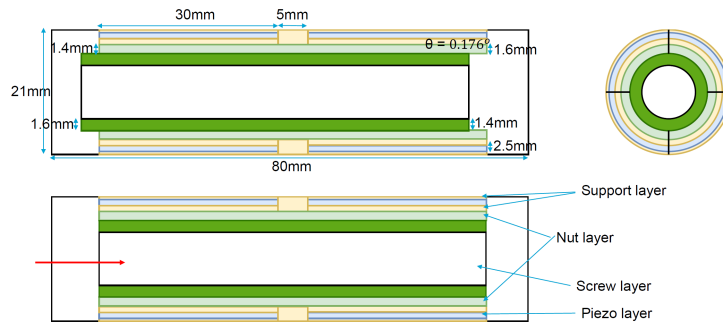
Draft of the preload design one: "wall anchor" structure.
